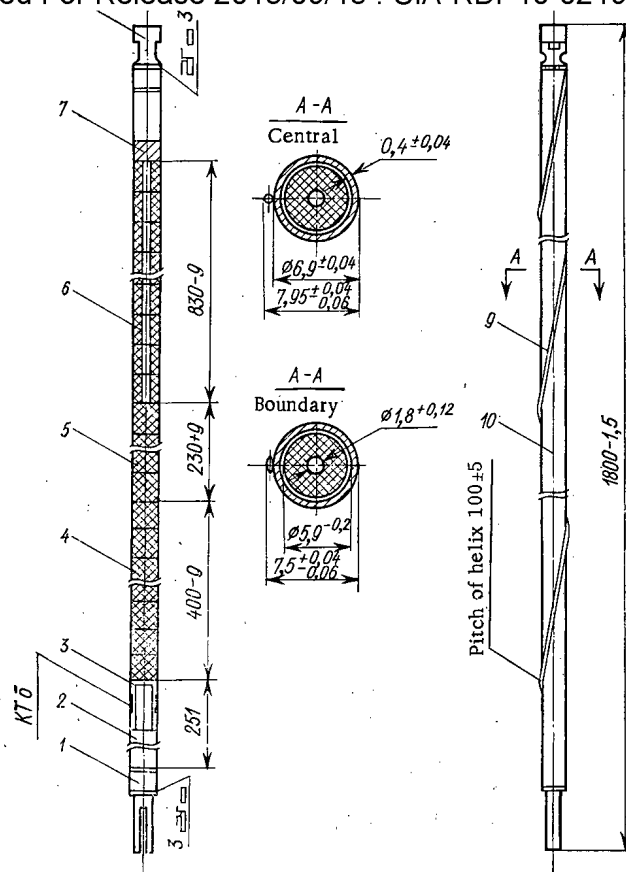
Core fuel element design for the second loading of the BN-350 reactor: 1) lower cap; 2) gas space; 3) can; 4) lower end shield briquet; 5) core briquet; 6) sleeve; 7) porous plug; 8) upper cap; 9) spacing wire (tape); 10) cladding.
